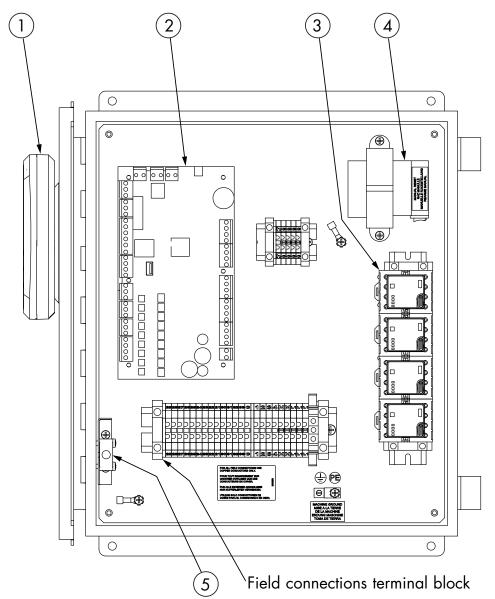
WETTED MEDIA SYSTEM CONTROL CABINET REPLACEMENT PARTS
